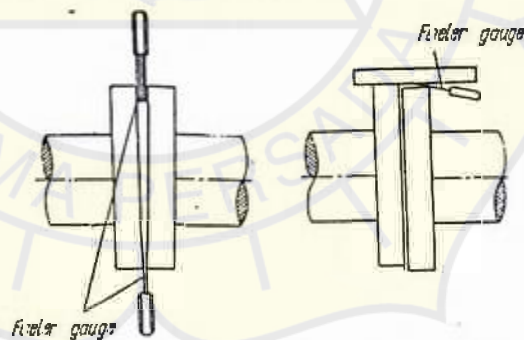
Checking breakage and flange shifting with the aid of a feeler gauge and rule
